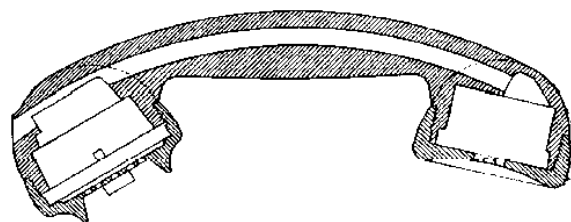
CROSS-SECTION OF HANDSET No. 1, SHOWING THE POSITION OF THE TUNNEL THROUGH THE HANDLE
